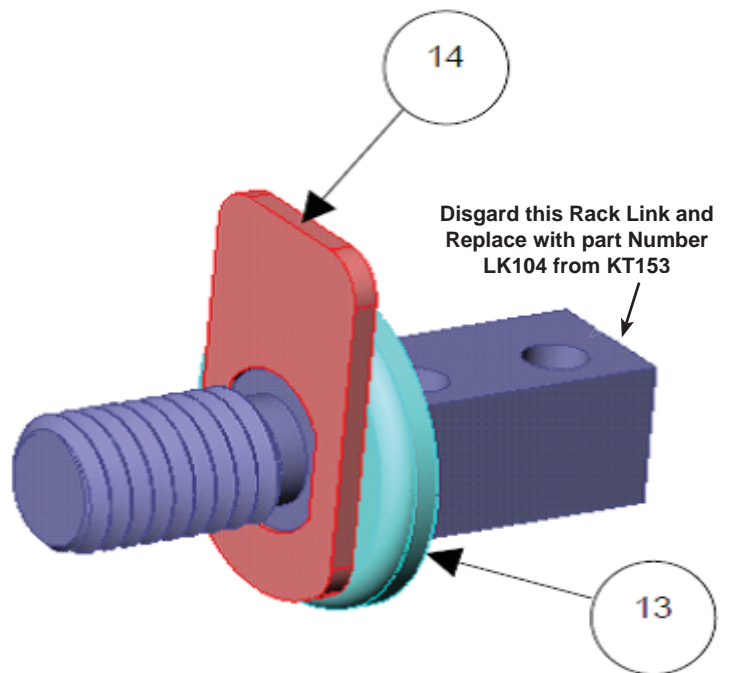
Link Sub Assembly From KT289 (Shown w/o Nut)
